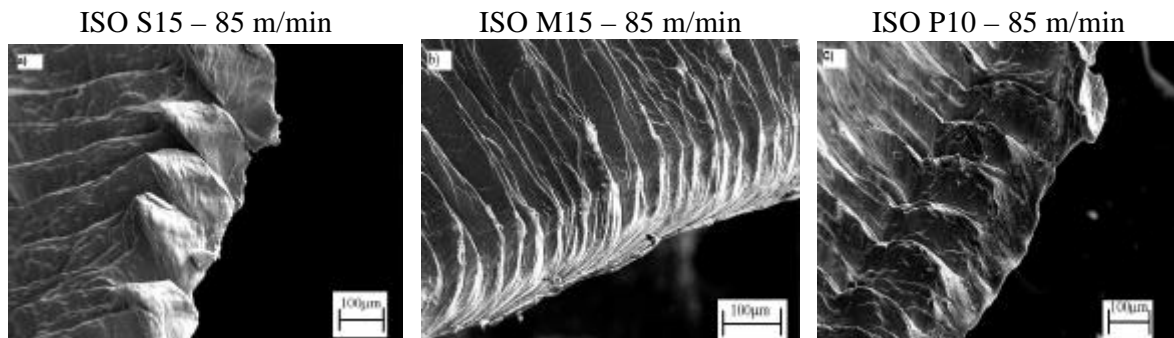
Chip formed in the machining of Ti-Al-4V for different cutting tools.
